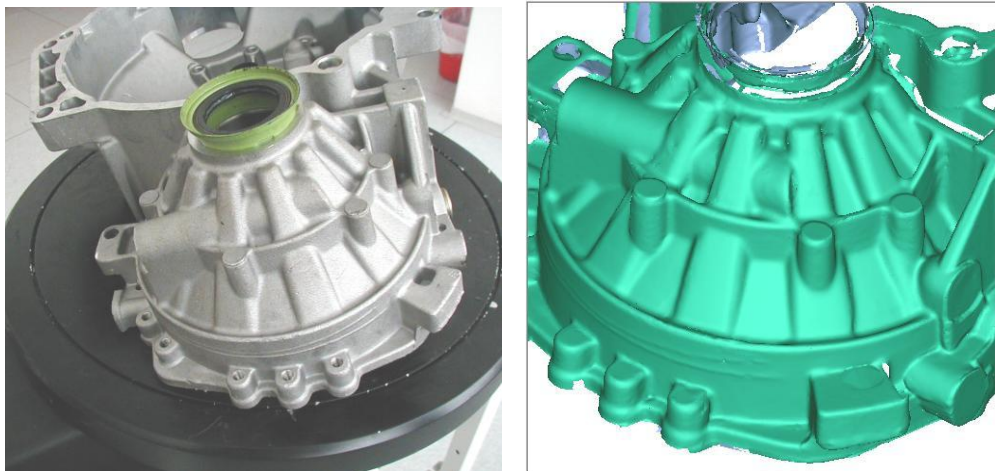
The Real VW Gearbox and Its Scanned Clouds of Points Model [16]
